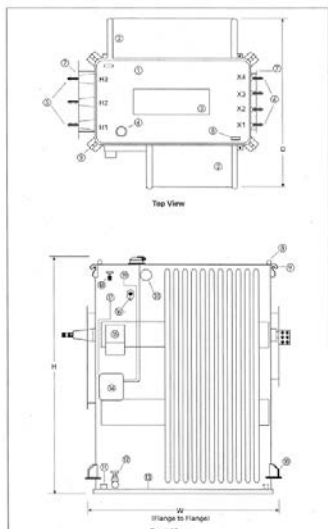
Liquid-Filled Primary Unit Substation Transformer with Well-Mounted HV and LV Bushings.
